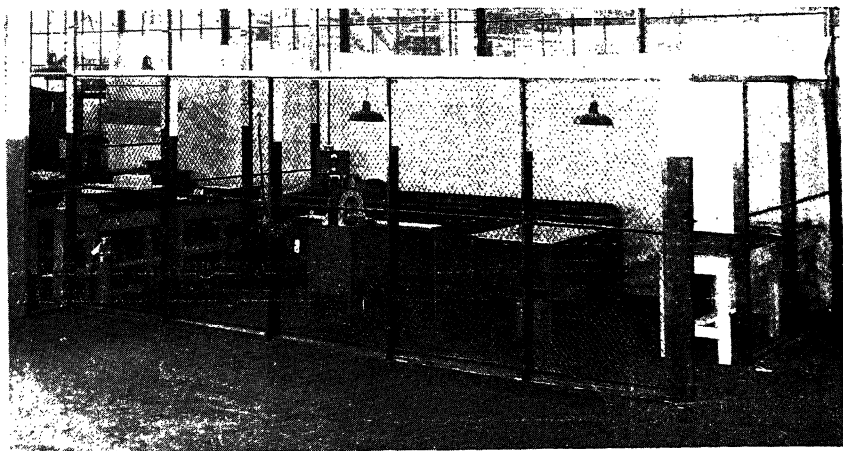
Proper enclosure method for certified magnetic inspection equipment.
